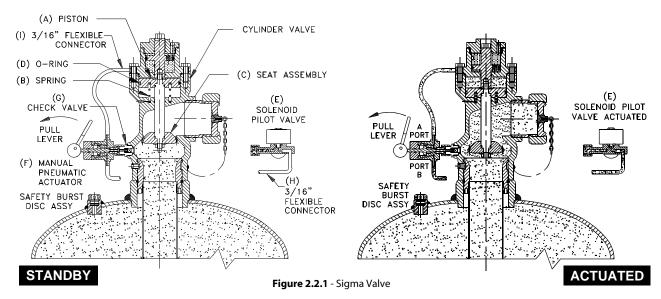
illustrates diagrammatically the two valve modes: standby, where the valve is awaiting actuation, and automatic actuation, where the valve has been electrically actuated.
